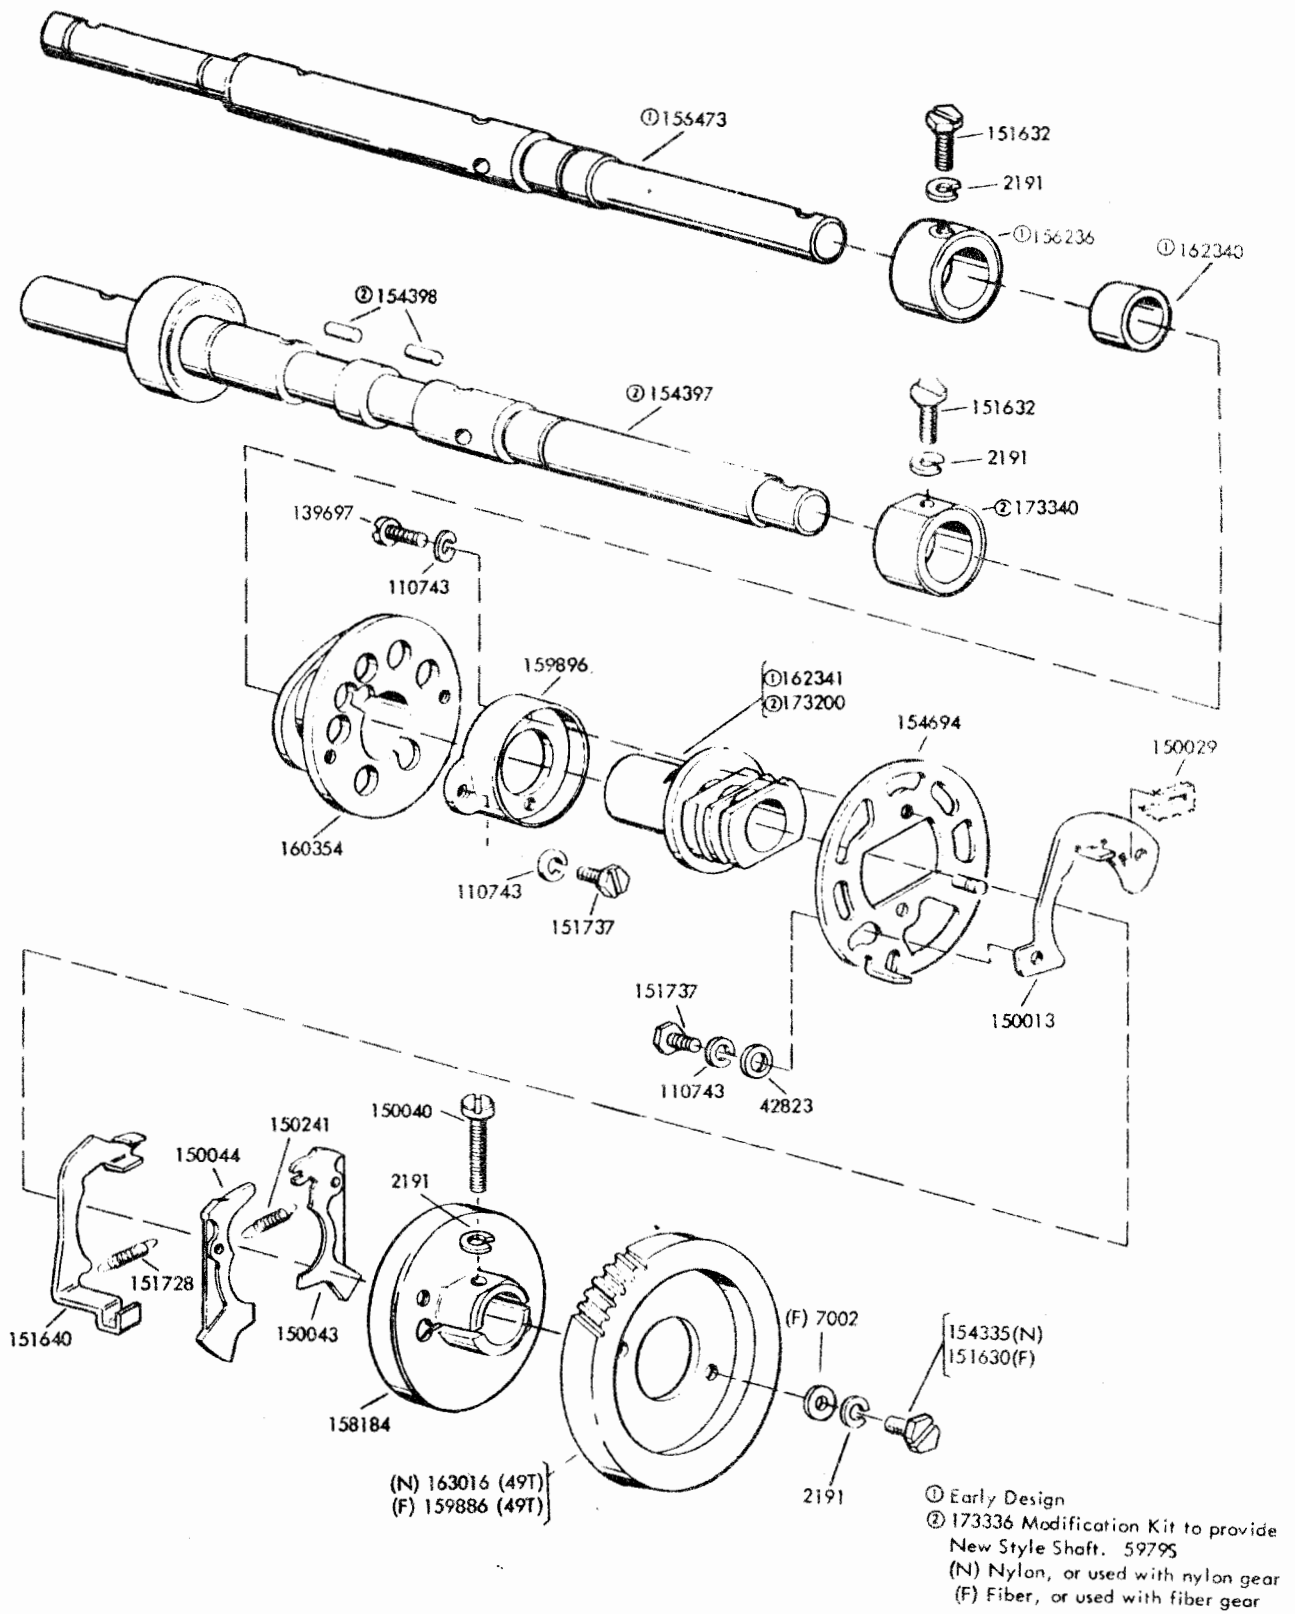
MAIN SHAFT MECHANISM (TYPING PERFORATOR)
